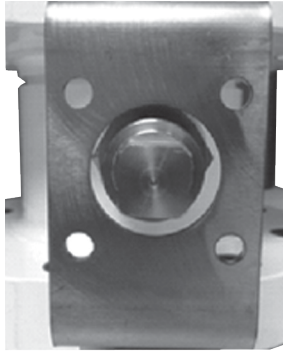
Coupler Installation for Size 3-inch Single and Double Flange Rotary Actuators
